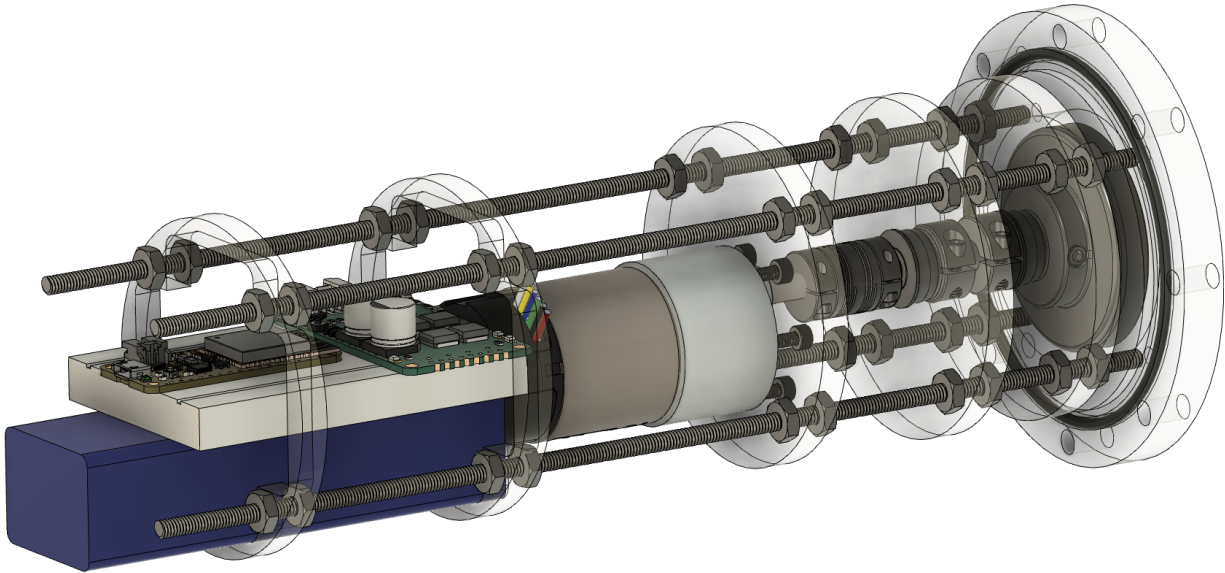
CAD - Isometric View of Internal Sub-Assembly.
